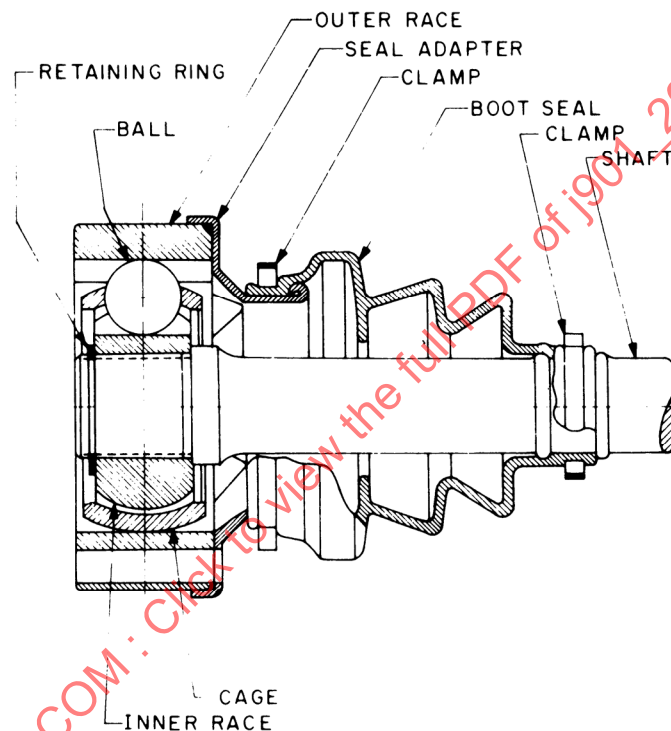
CROSS GROOVE UNIVERSAL JOINT
